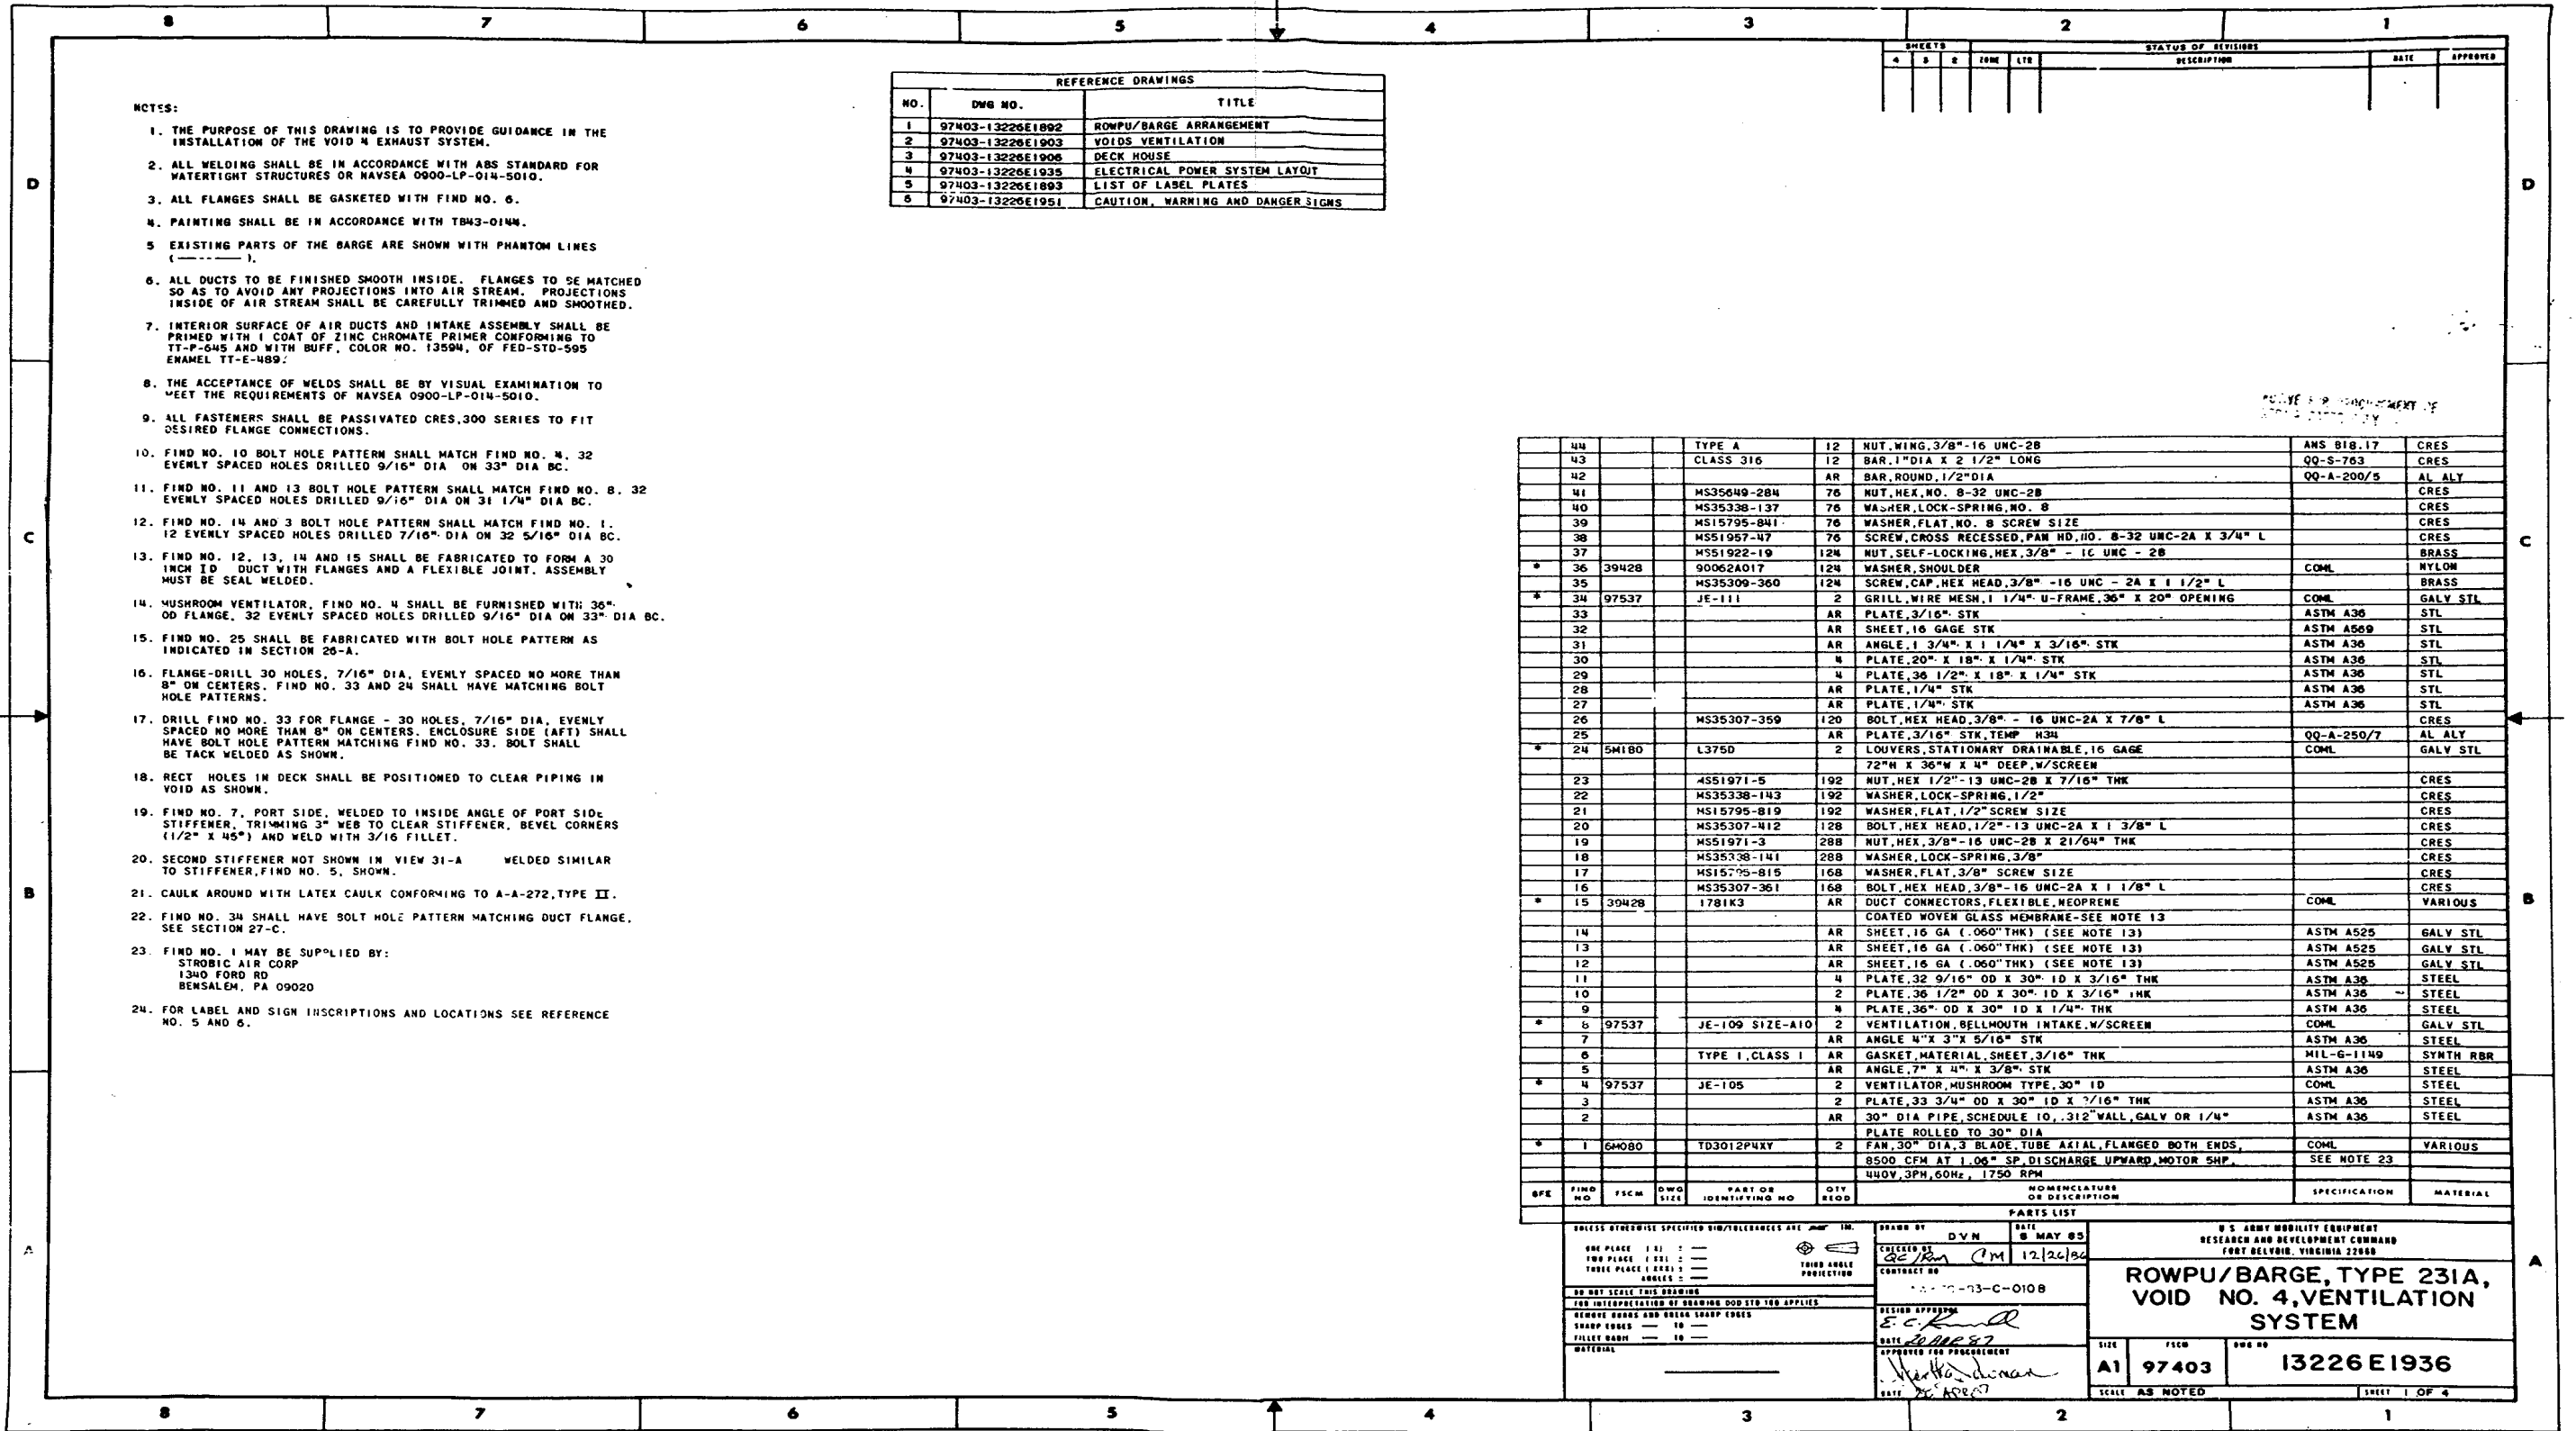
(Sheet 1 of 4) FP-555/(FP-556 Blank)
